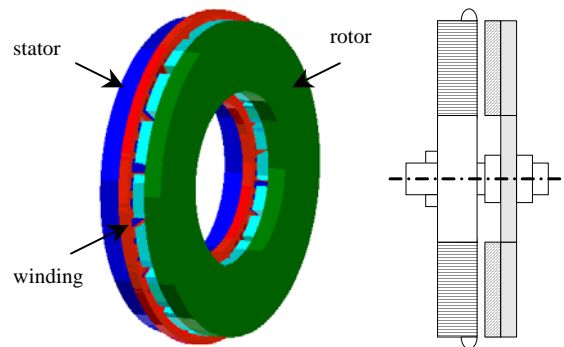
Single-rotor-single-stator axial flux PM machine structure
